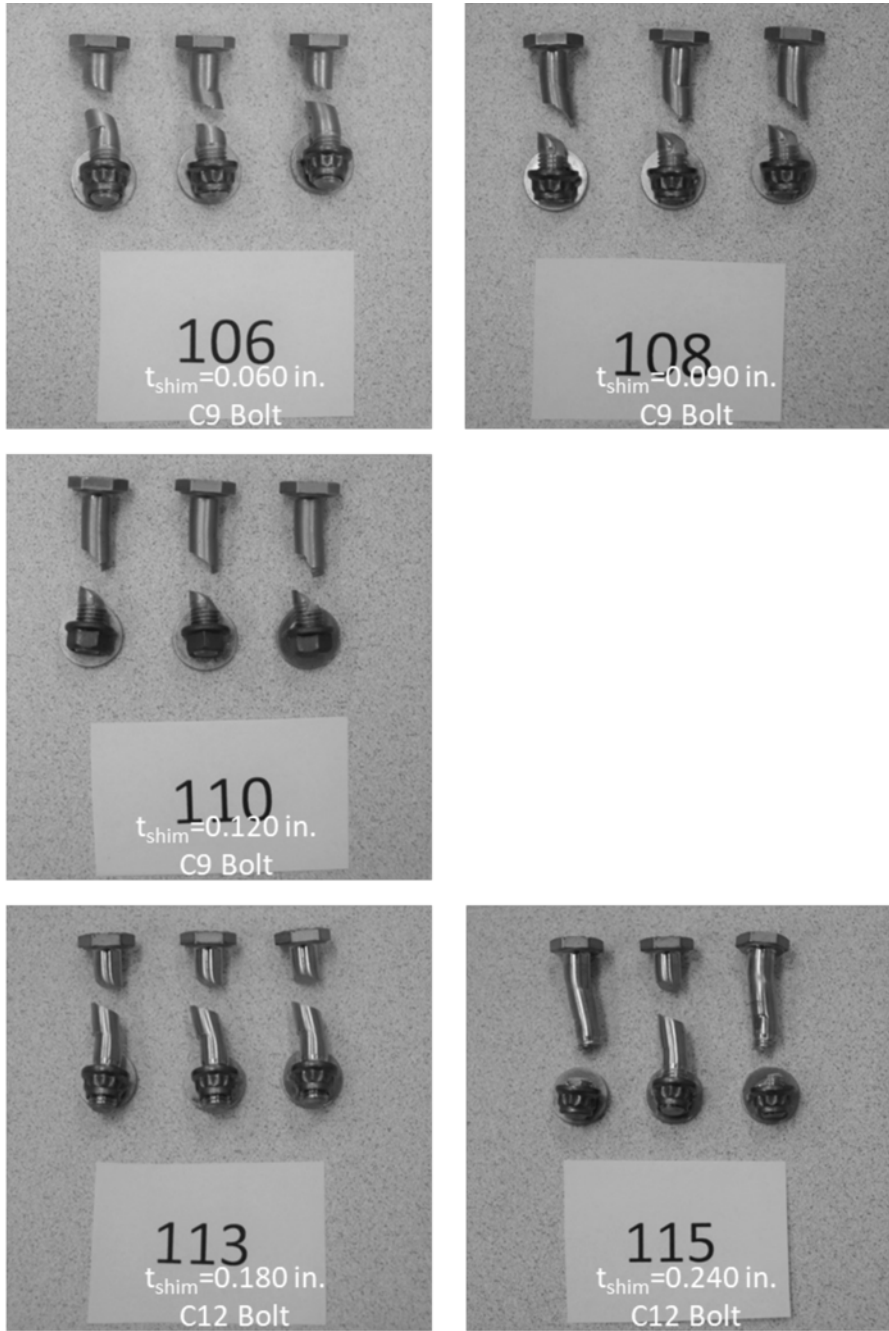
Fractured bolt specimens from select cases loaded at 45° with steel pucks.
